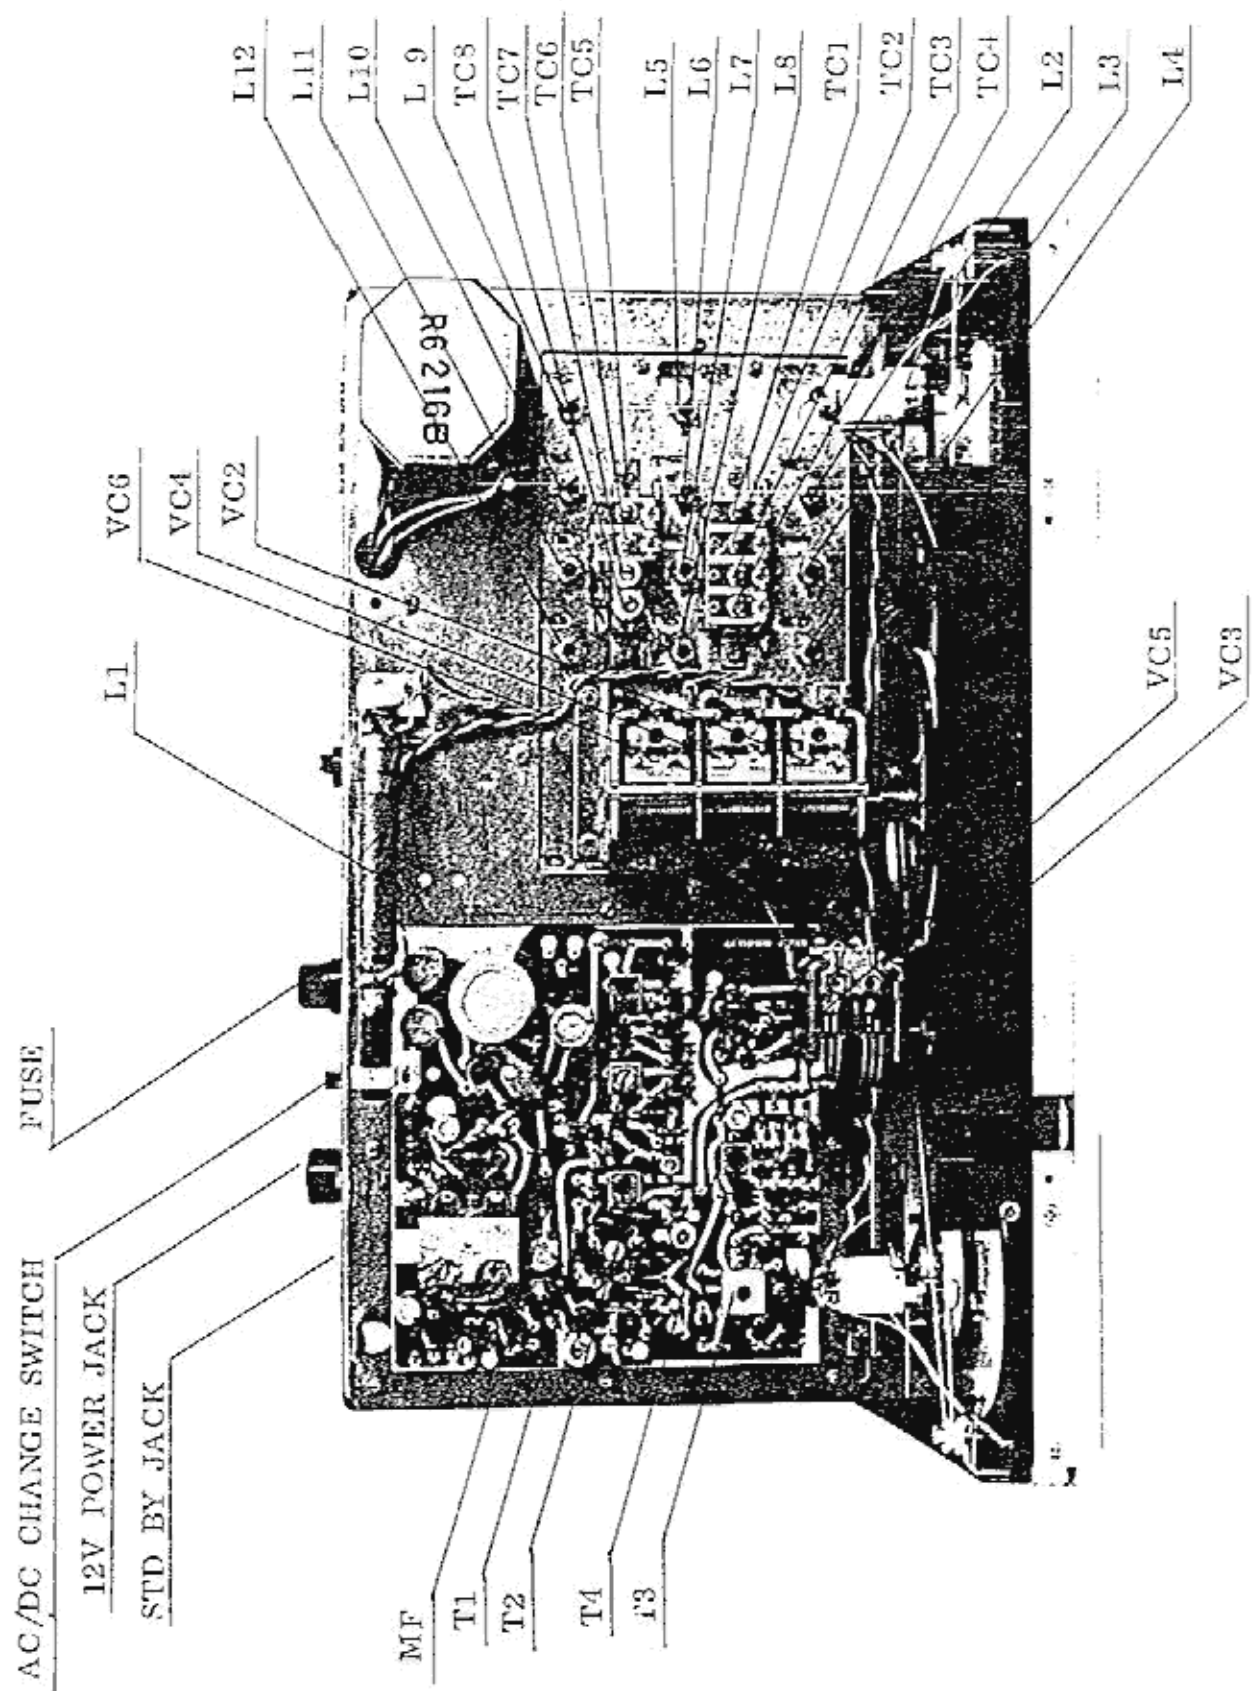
TOP VIEW OF DX-150A CHASSIS PARTS LOCATION
